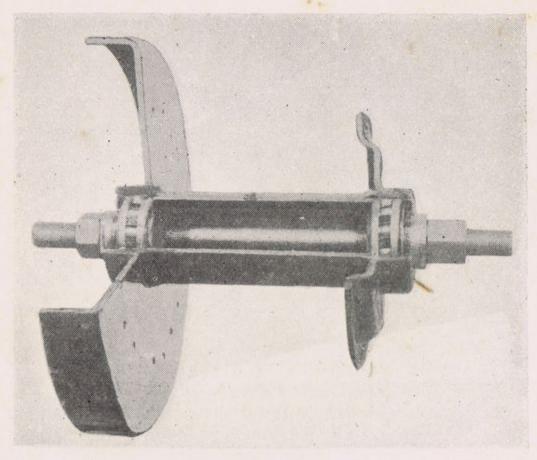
Matchless Front Hub and Brake Anchor Plate Sectioned to Show Construction
